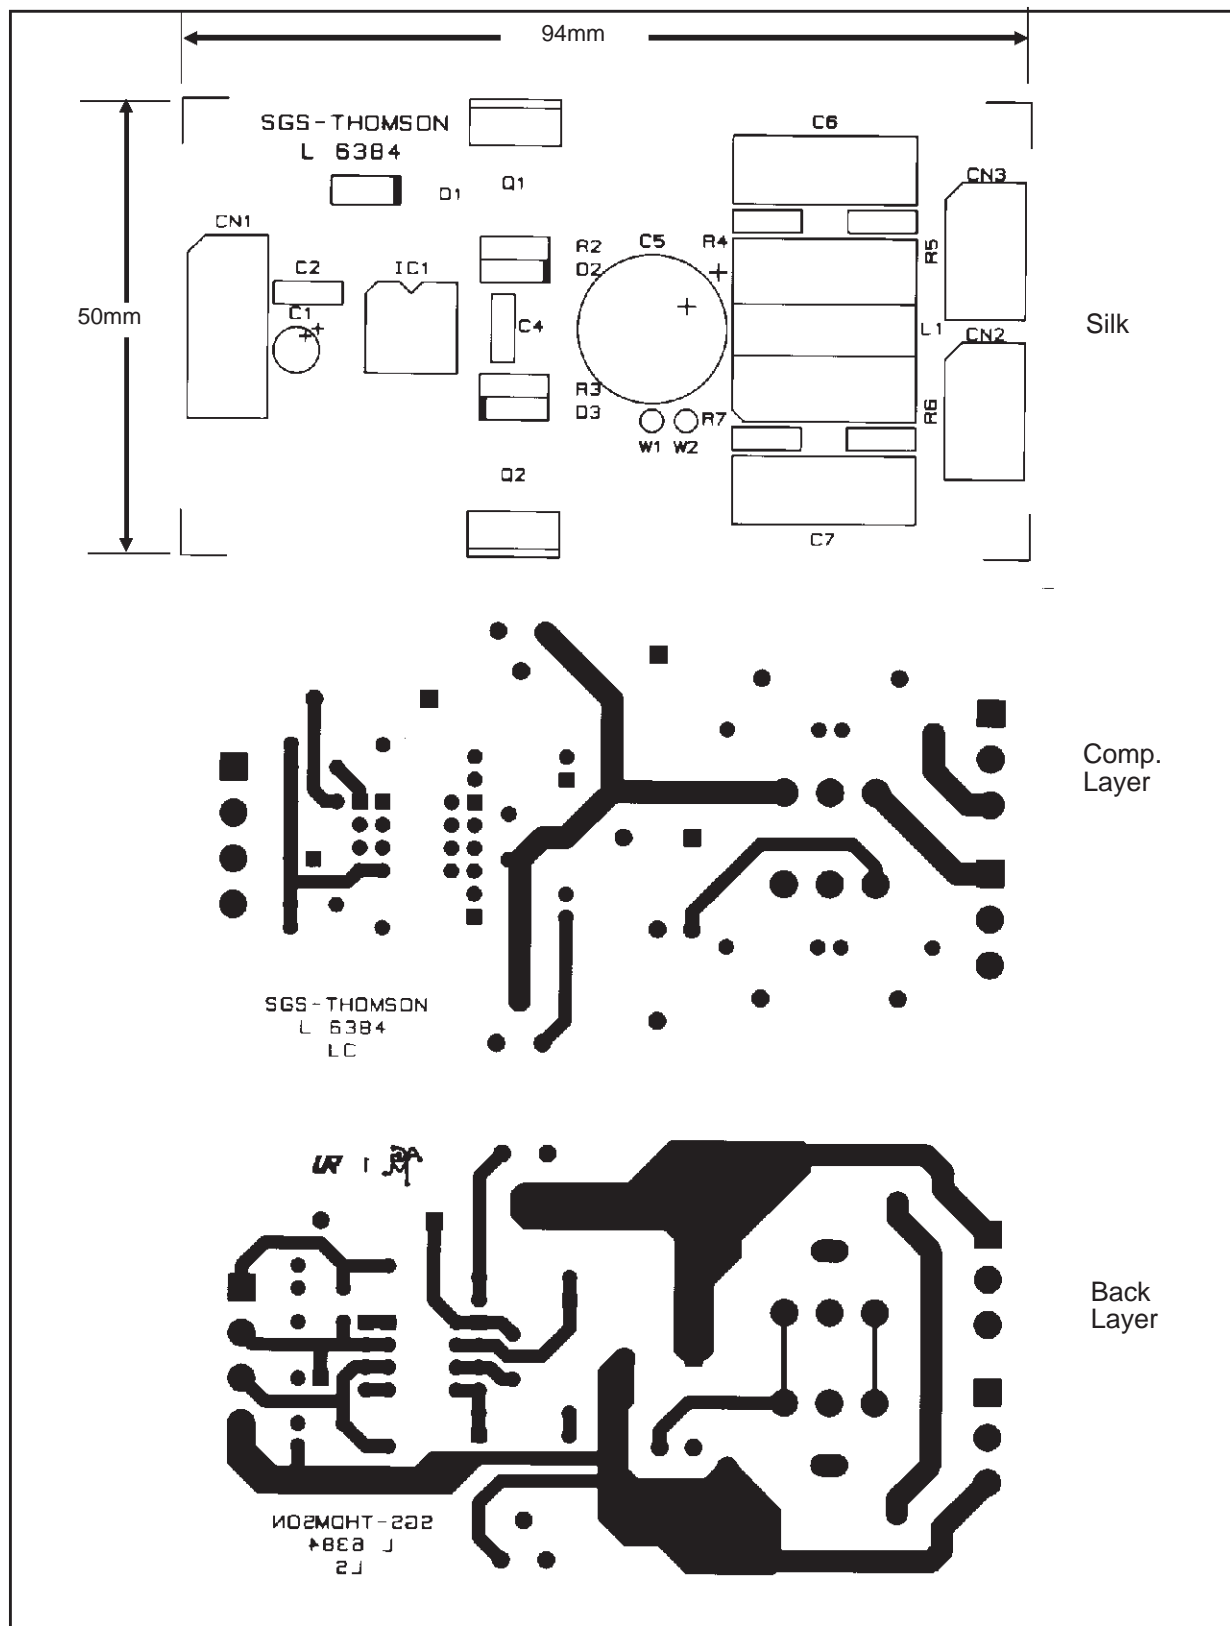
L6384 - PCB and component layout of the fig. 2.
